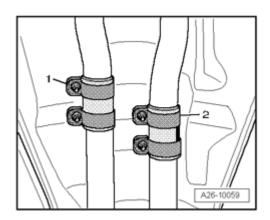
Removing/Installing Mounting Bolts For Front Exhaust Pipes Courtesy of VOLKSWAGEN UNITED STATES, INC.
